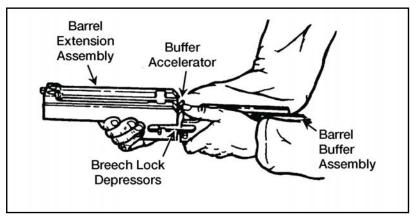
Attachment of the barrel buffer and barrel extension assemblies
